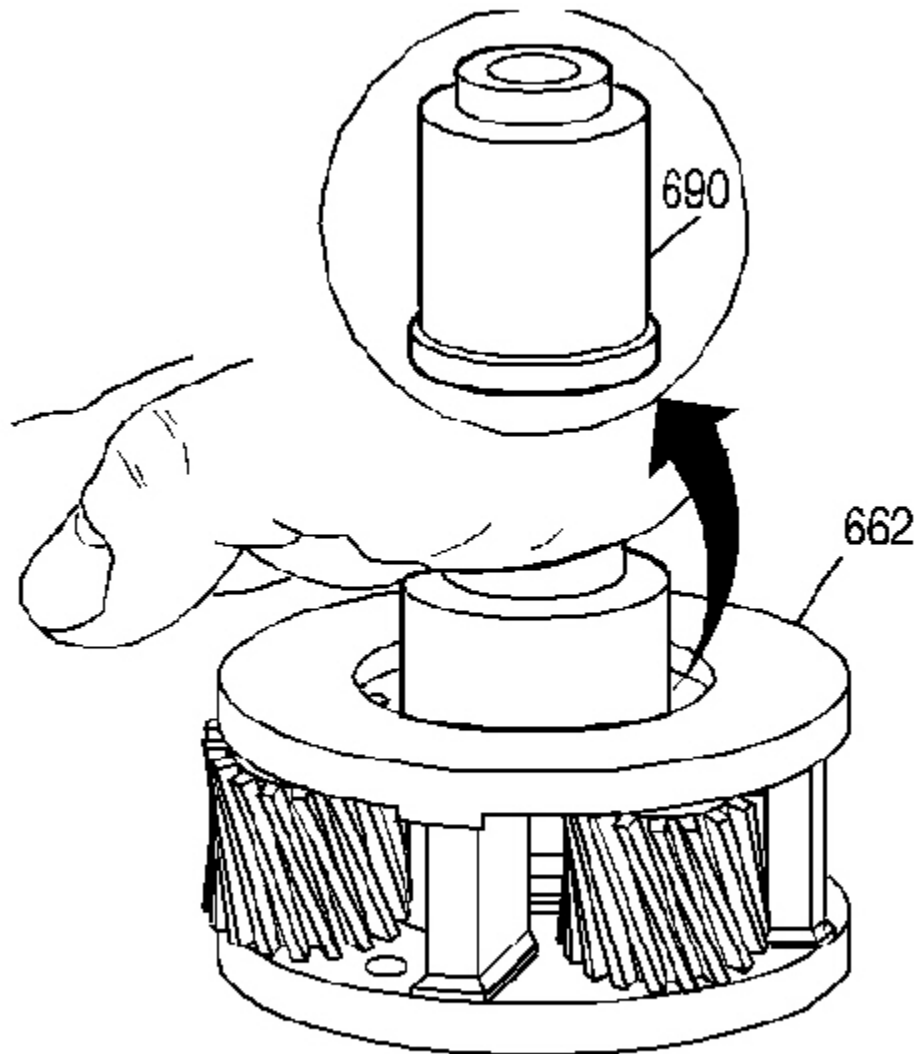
View Of Input Carrier Captive Thrust Bearing Assembly
